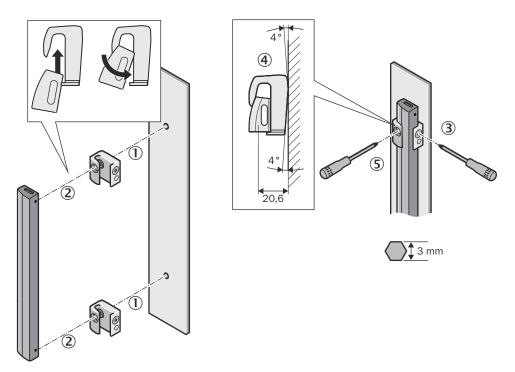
Mounting with C-Fix-Flex bracket, protective field parallel to the mounting surface
